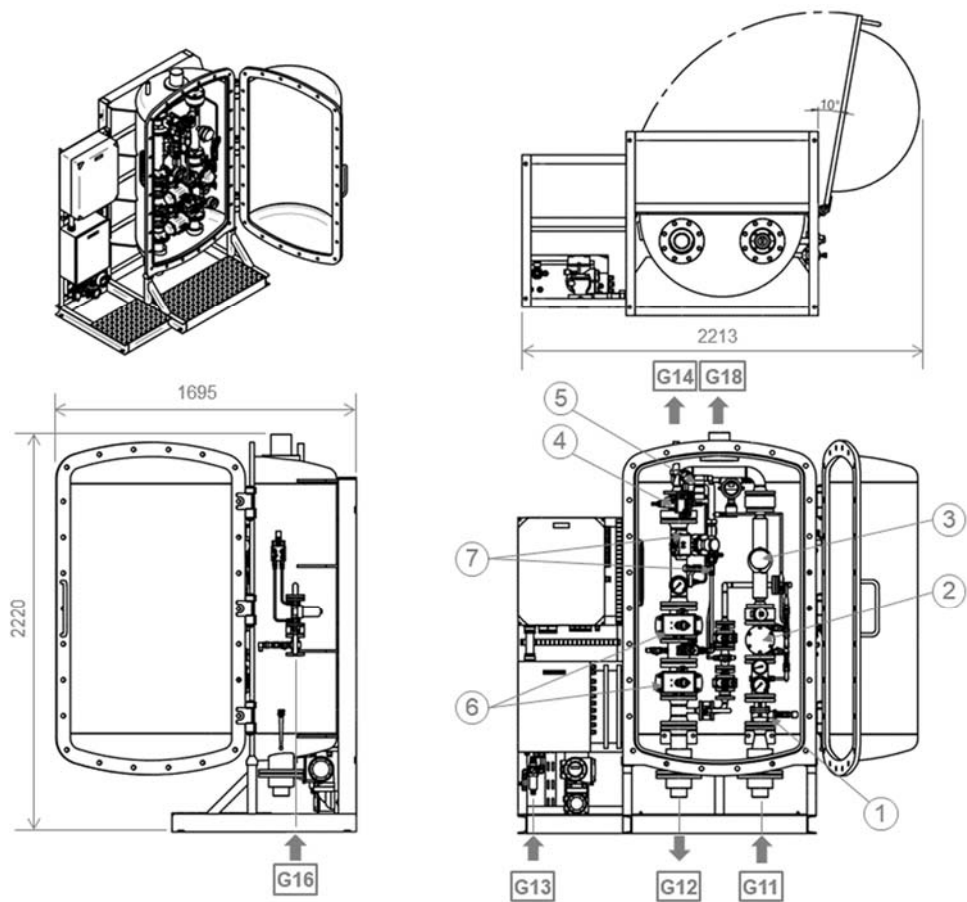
Typical drawing of enclosed type gas regulating valve unit
